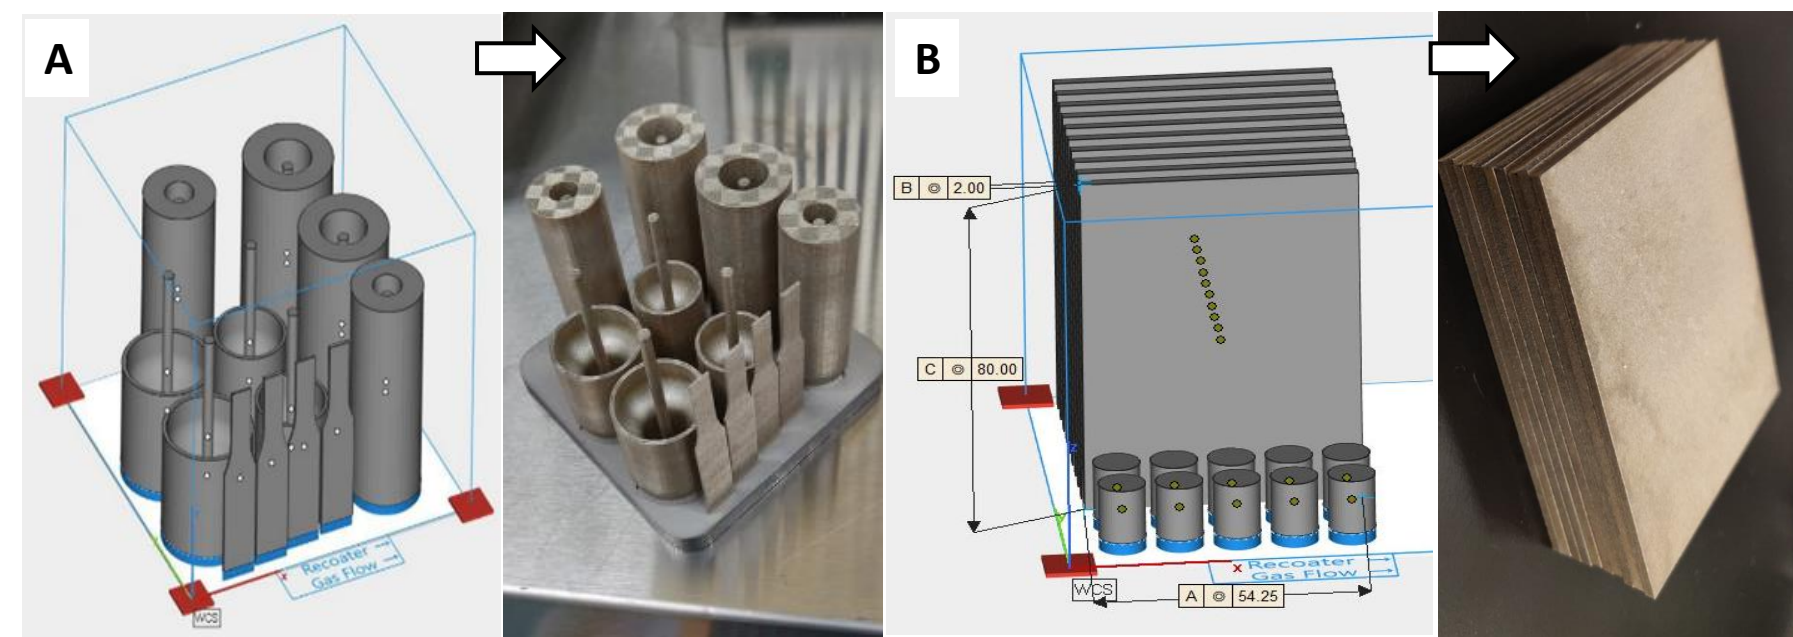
CAD model and 3D Printed specimens a) pipes, b) plates for Selective Laser Melting (SLM) printing
